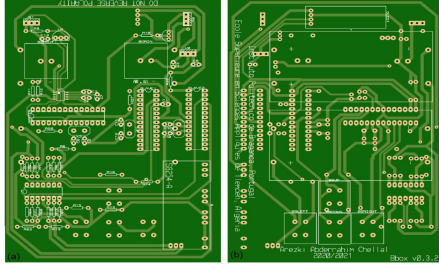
Prototype printed circuit board. (a) components view. (b) top view.
